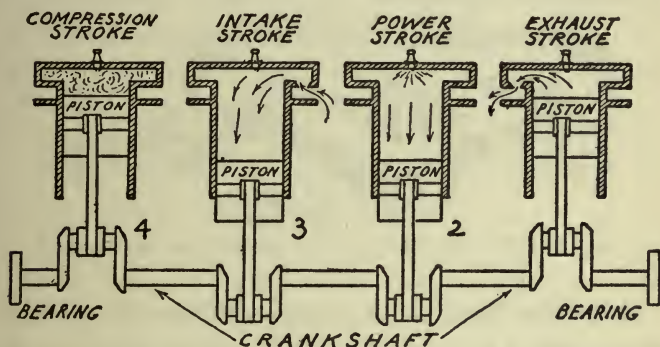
DIAGRAM OF A FOUR-CYLINDER ENGINE SHOWING HOW PISTONS ARE CONNECTED TO A SINGLE CRANKSHAFT
